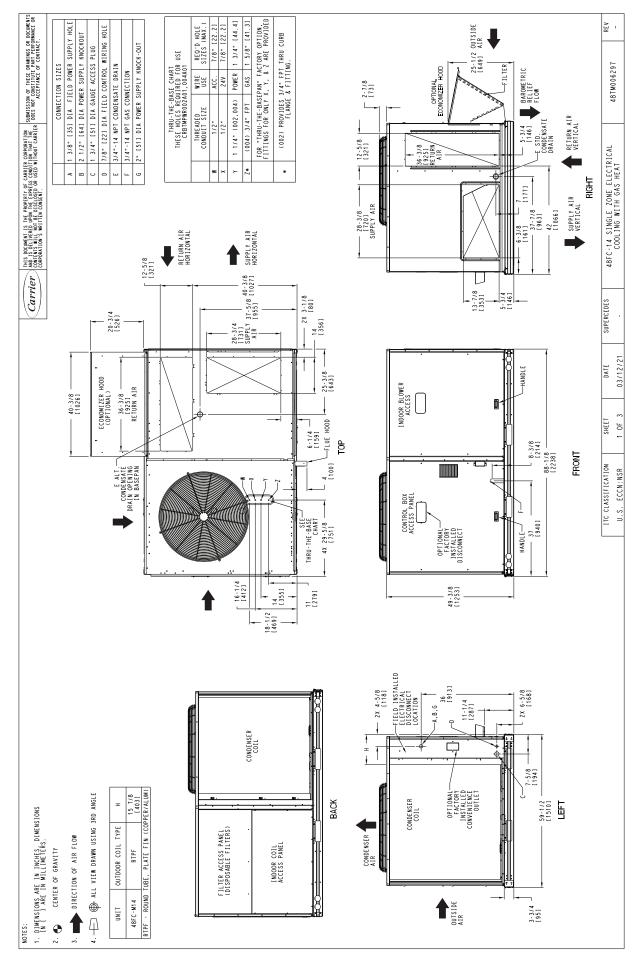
Unit Dimensional Drawing – Sizes 14
